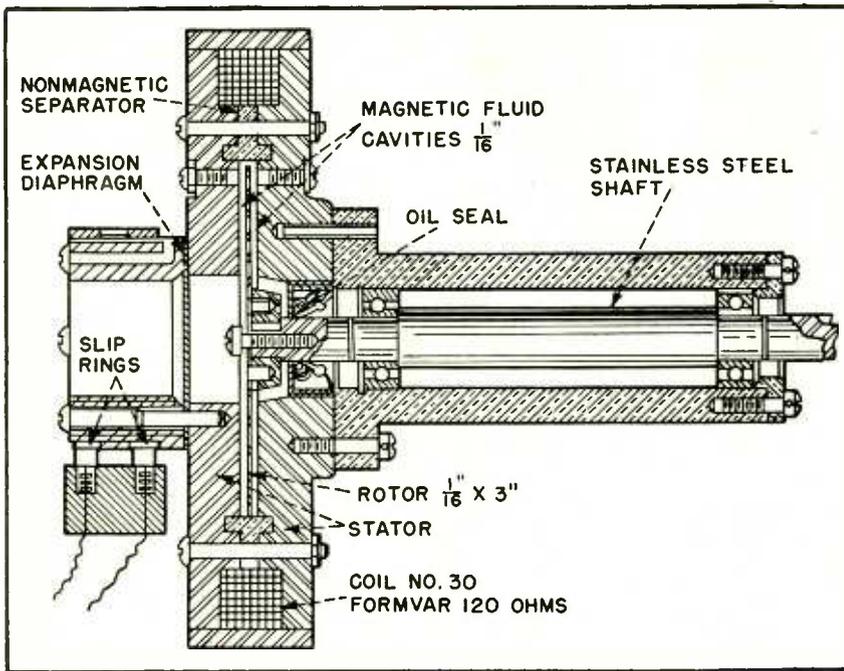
Cross-section of single-disk magnetic fluid clutch. Rotor disk is bolted to end of shaft
